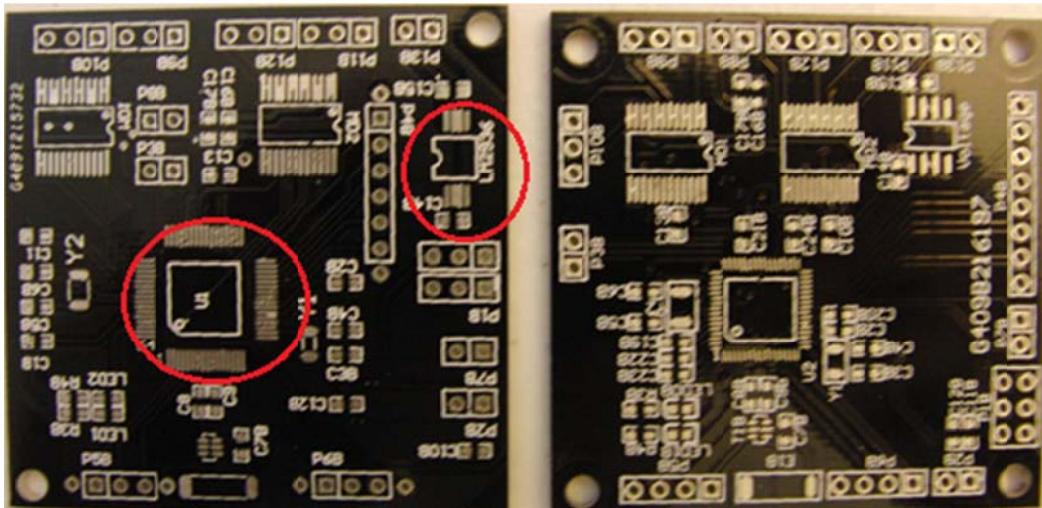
Defected PCB Boards on the left and Re-made PCB on the right
